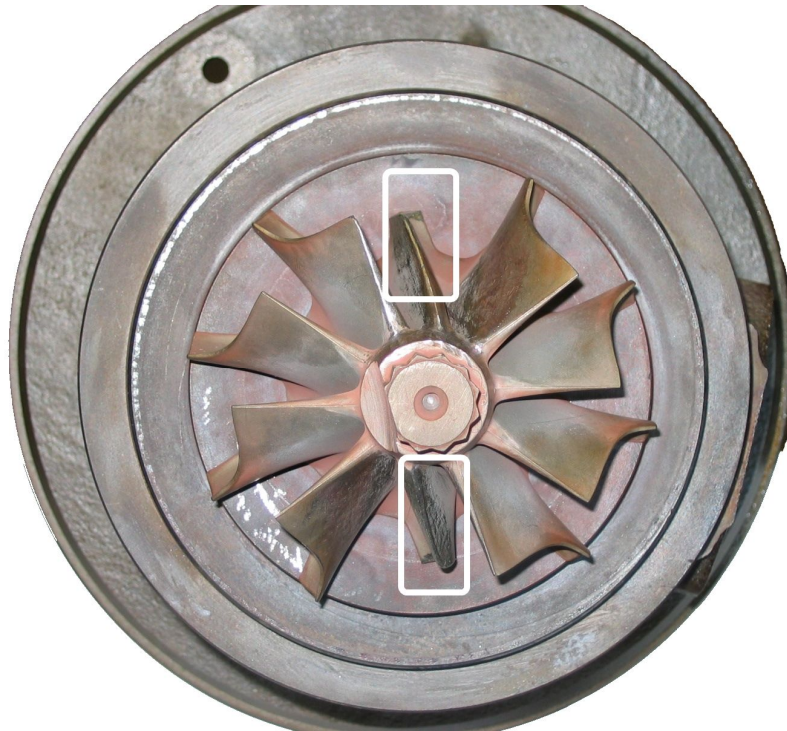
Free power turbine impeller with two damaged blades.
